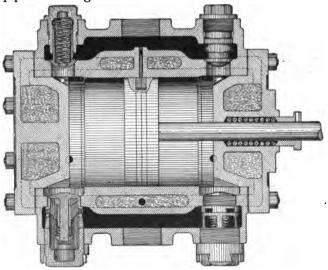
Ingersoll-Sergeant air-compressor cylinder (sectional view).
